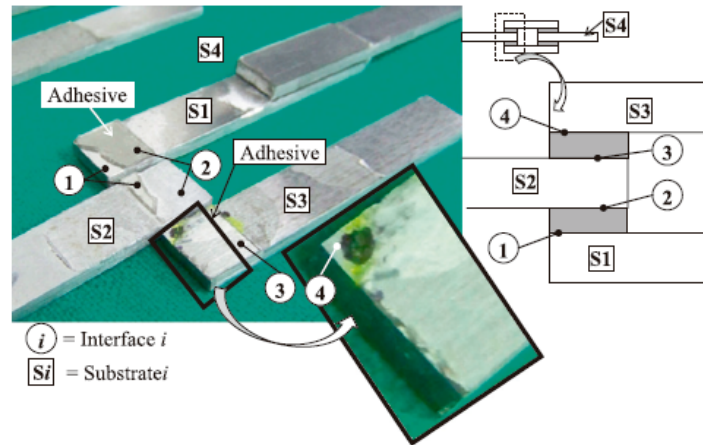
Failure in a type B specimen ($l=10$ mm).
